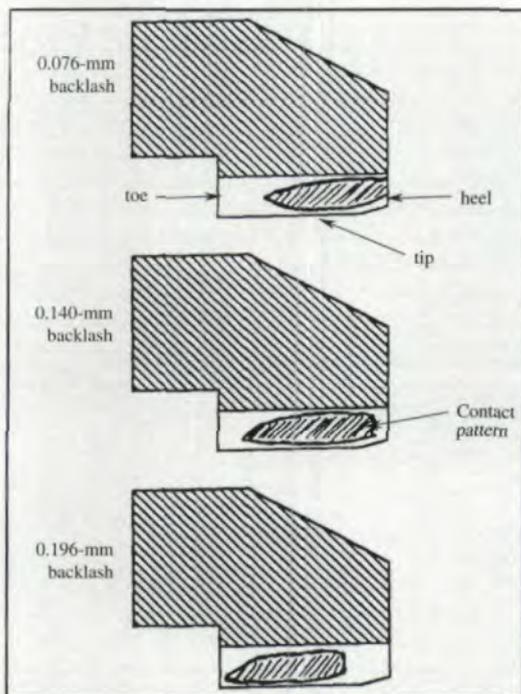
Effect of face-gear shimming and backlash on tooth contact pattern (test side face gear).
